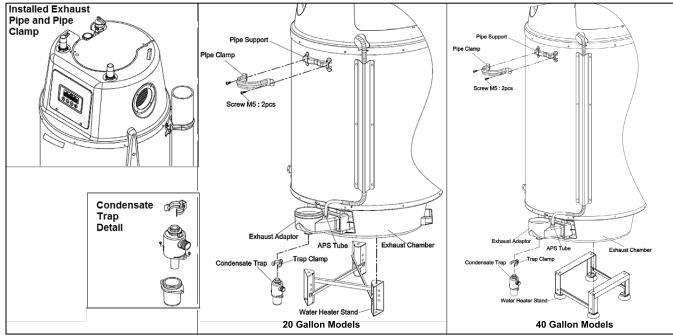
Installing the Water Heater Exhaust Pipe Clamp, Condensate Trap, and Setting the Water Heater on the Stand
